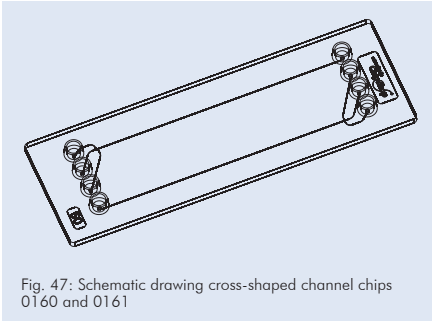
Schematic drawing cross-shaped channel chips 0160 and 0161
